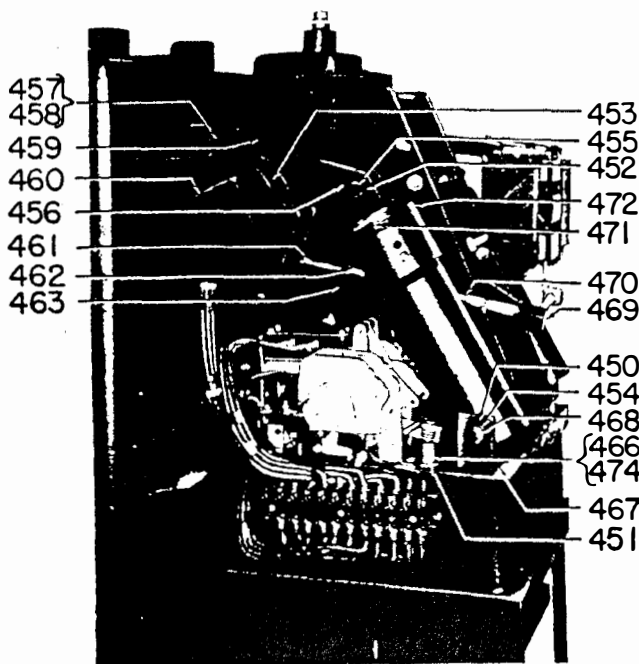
A. Right side view of types MS-13 mechanism for the types AM-4.16-1 and -2 breakers
